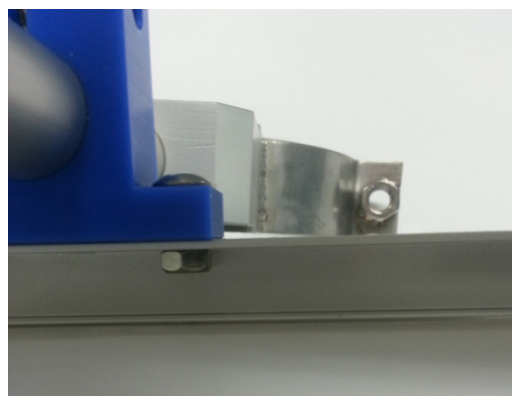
④. Fix solar cell by solar cell fixture bolt and nut.
